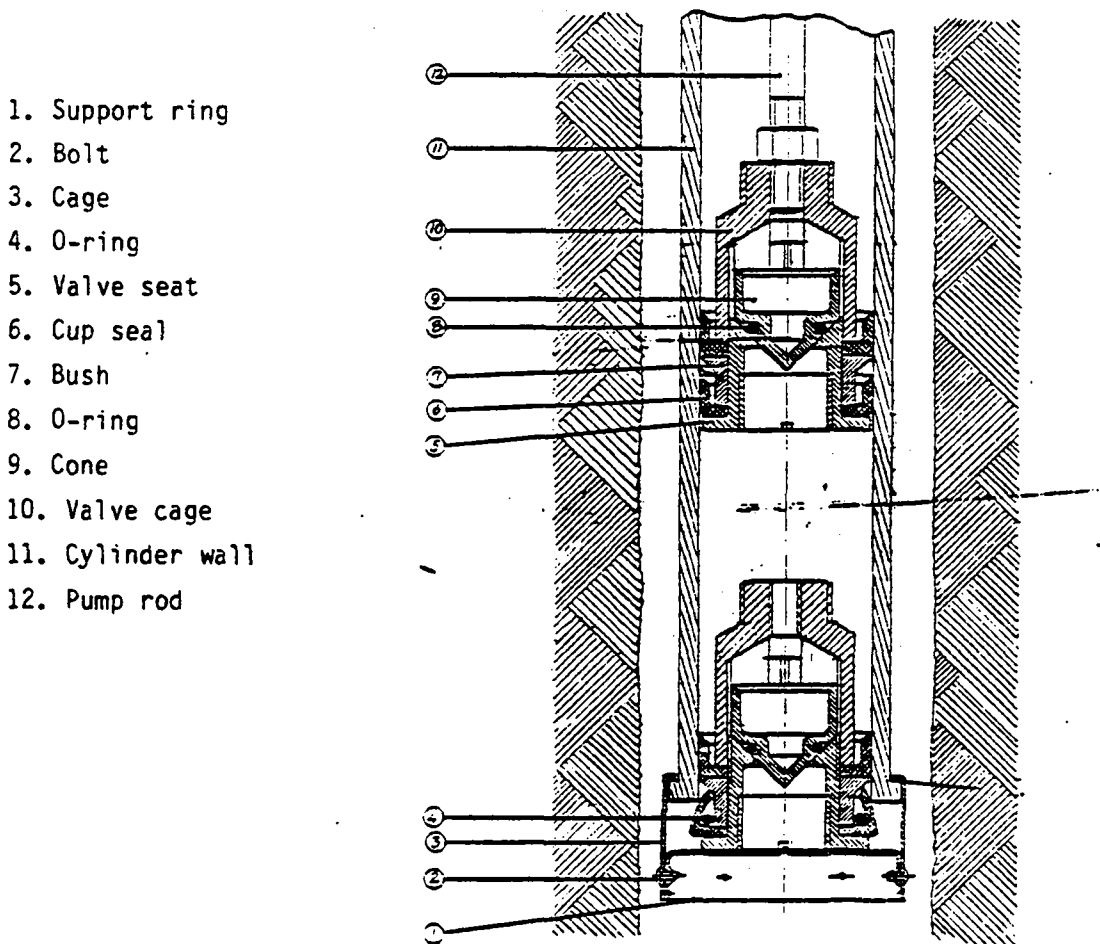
Design suggestion for open-type cylinder with extractable piston and foot-valve.
